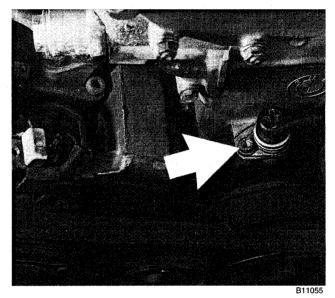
Drive belt tensioner mounting bolts (arrows).
